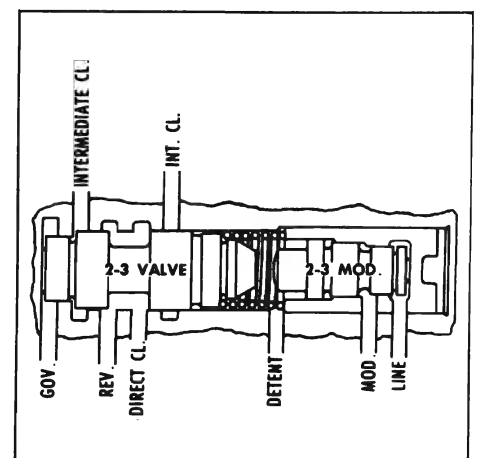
2-3 Shift Valve and 2-3 Modulator Valve
